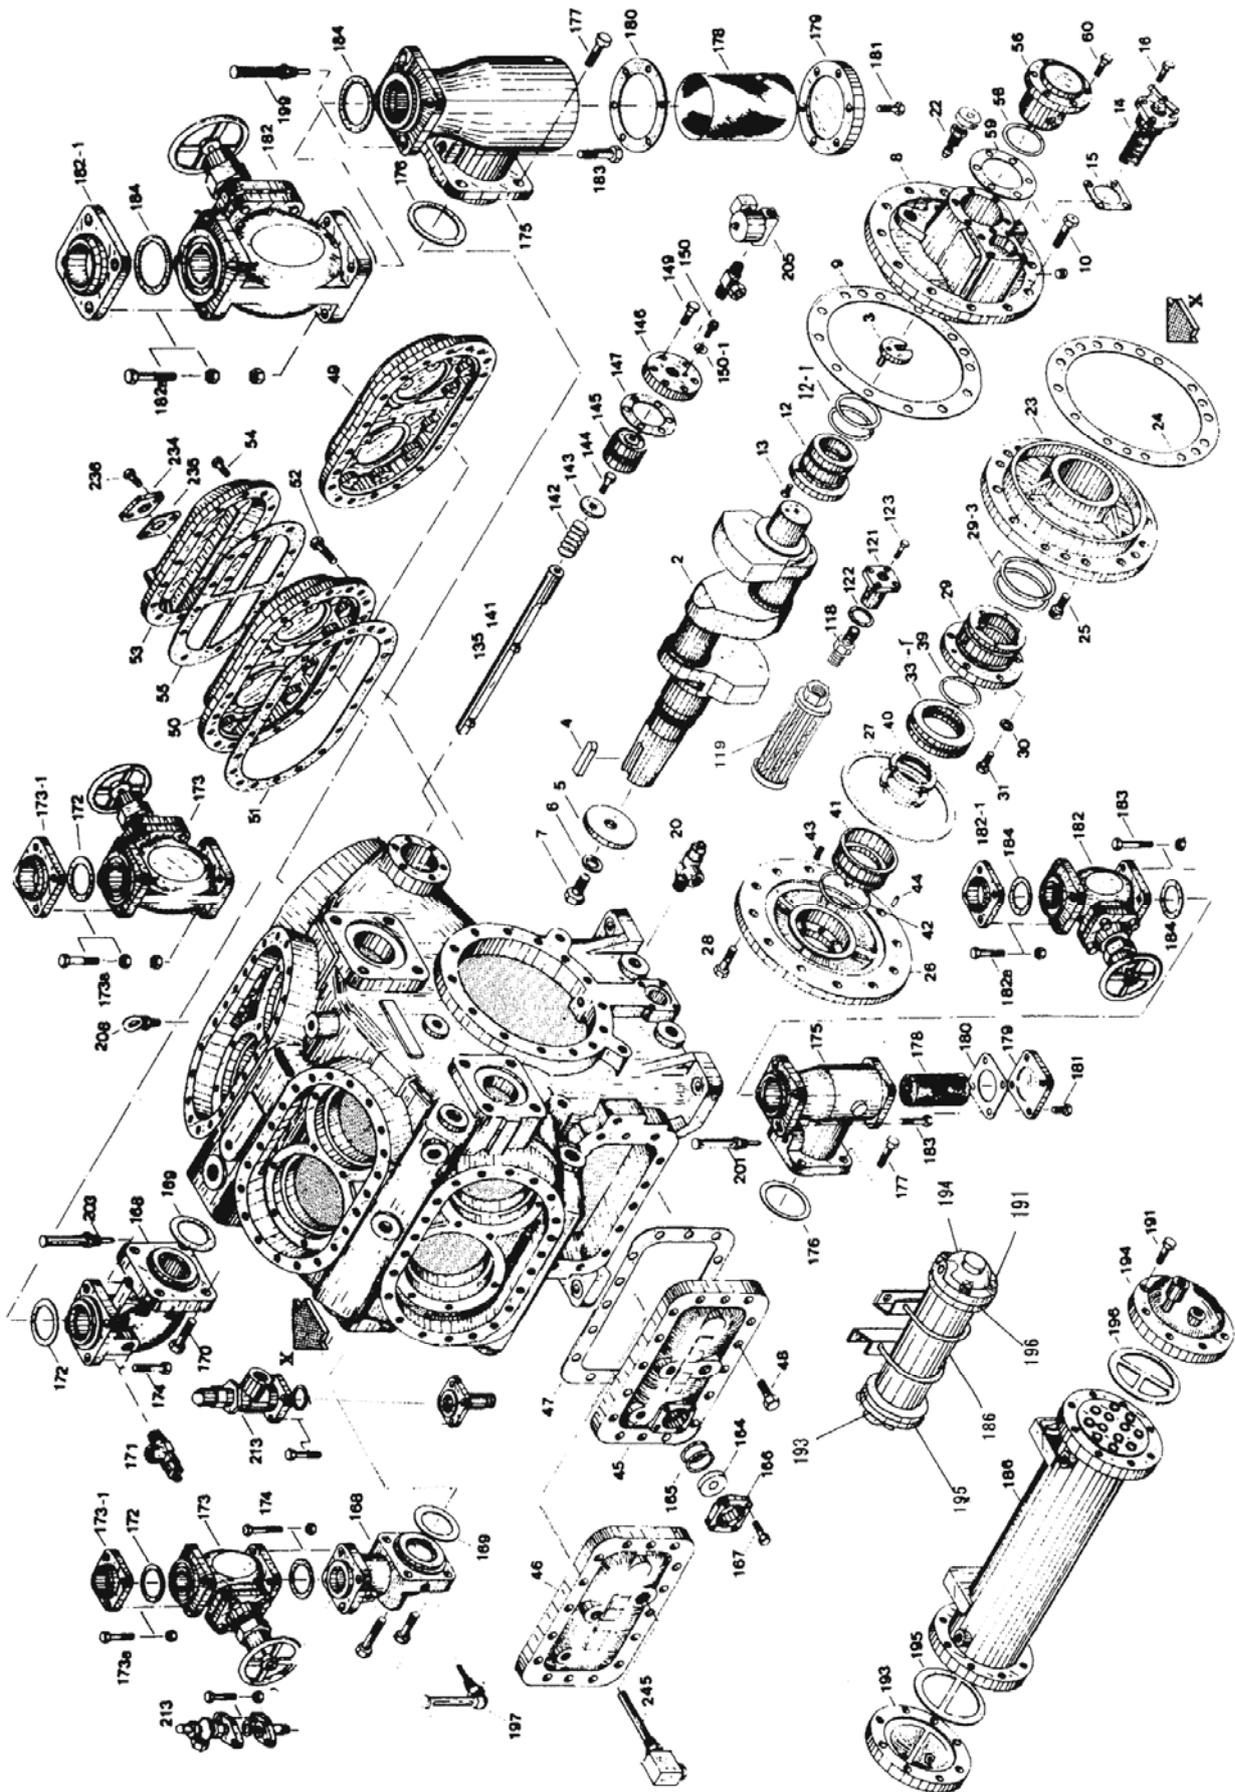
Development View of the Entire WB-type (62WB) Compressor
